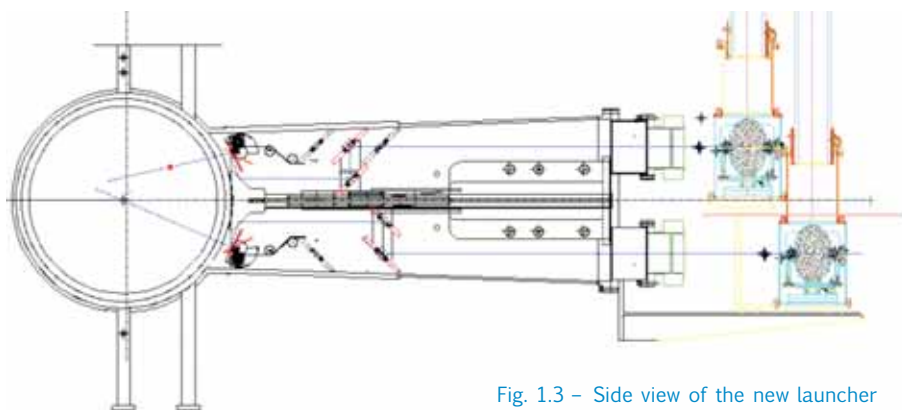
Side view of the new launcher in a FTU port, showing the beam axes
